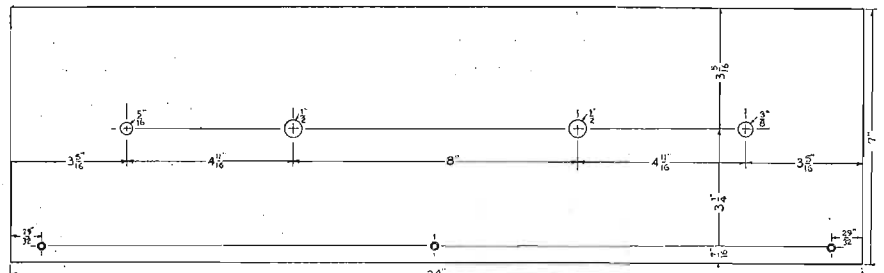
Sub base drilling DRAWING. "If drilled carefully, assembly takes but 20 minutes"
